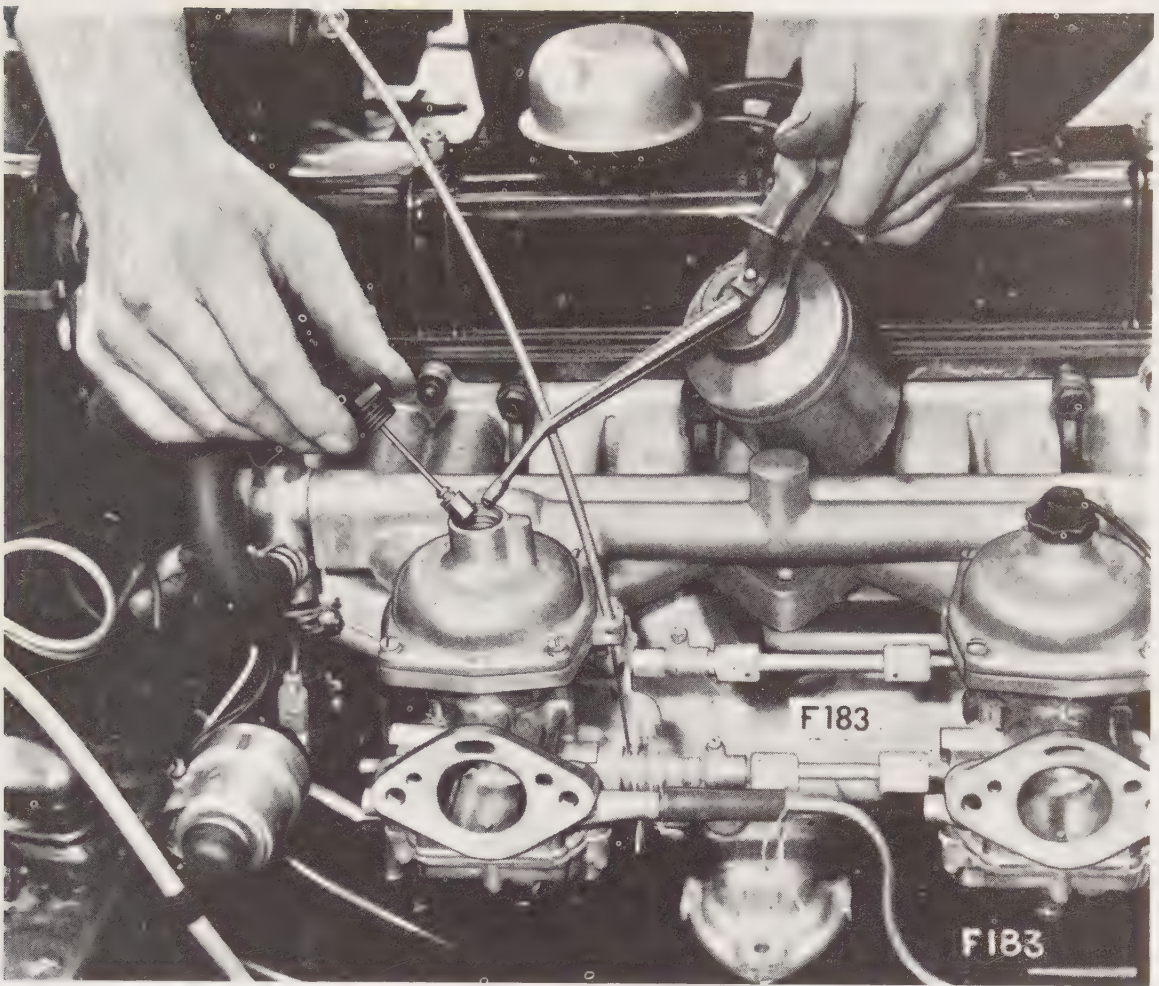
28 Twin Stromberg carburetters installed on 2-litre engine.
